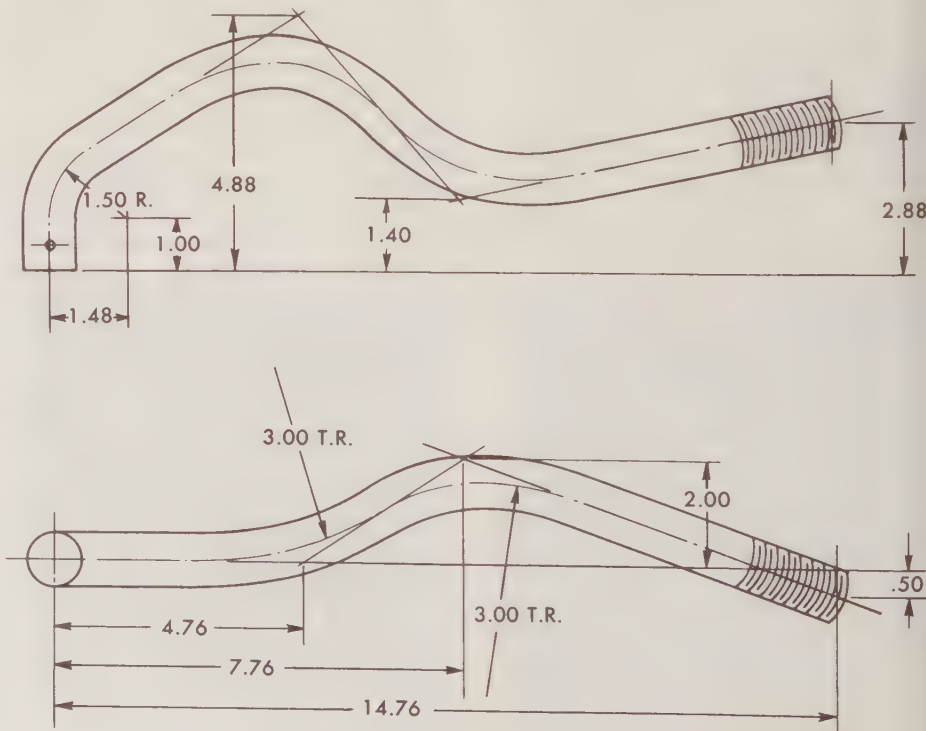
Part drawing shows final shape and all dimensions essential to determine the true length.
